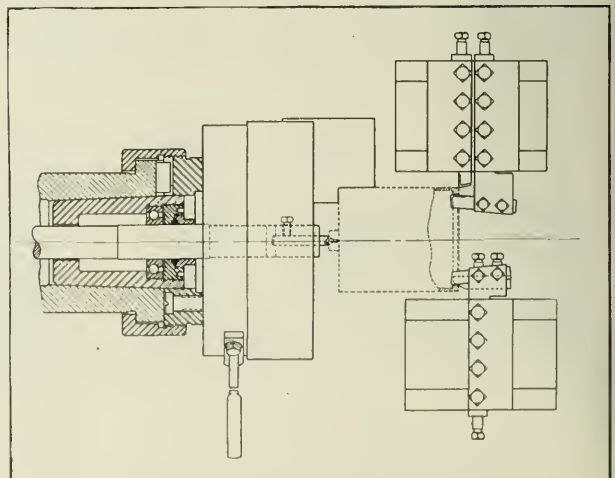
Roughing and finishing Skirt of Aluminum Piston and centering Closed End
